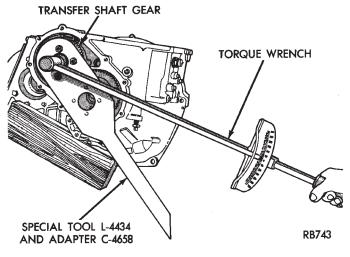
Tighten Transfer Shaft Gear Retaining Nut to 271 Nom (200 ft. lbs.)
